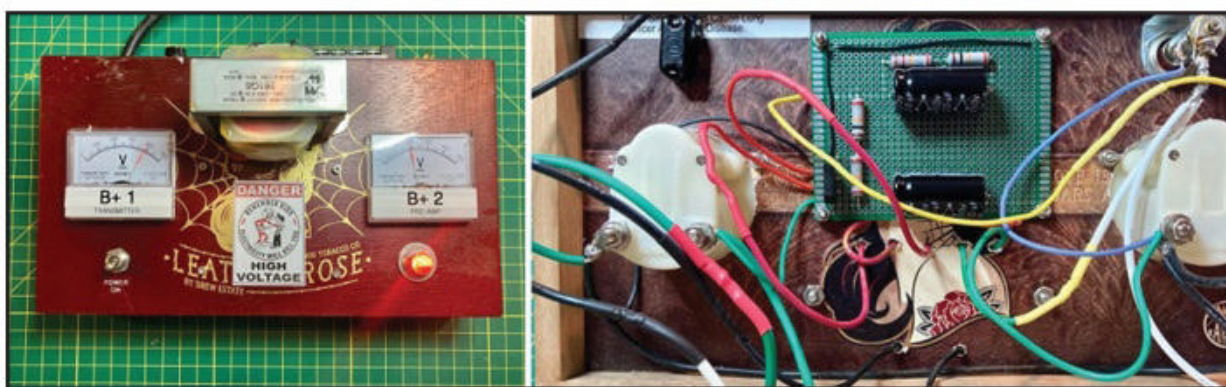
Photo F. These photographs show how the second power supply was assembled, both inside and outside.
